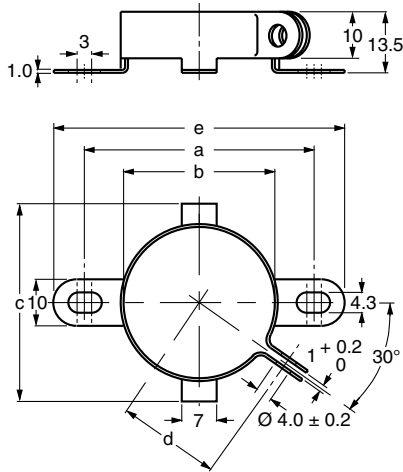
Dimensional outline of clamp for case $\varnothing D = 25, 30$ and 40 mm
